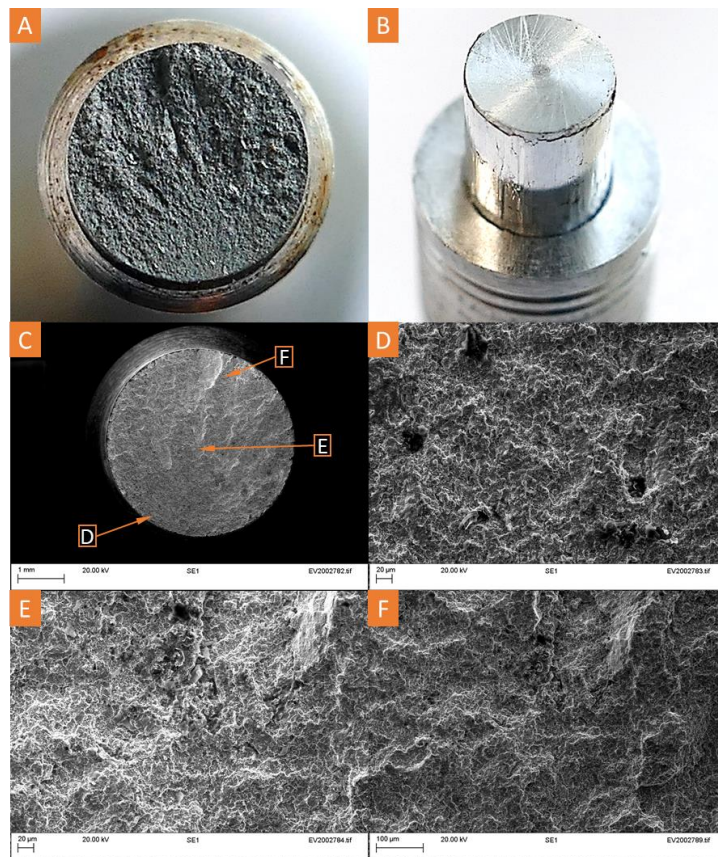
Fracture surface of the components from Tool 3 after 55 welds:
